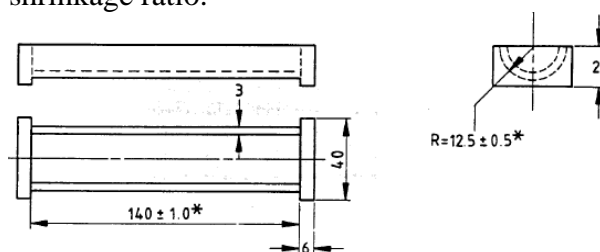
Mold Dimension in Millimeters for Linear Shrinkage Test (BS 1377-2:1990).
